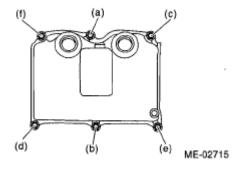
Identifying Rocker Cover Bolts - RH Side
